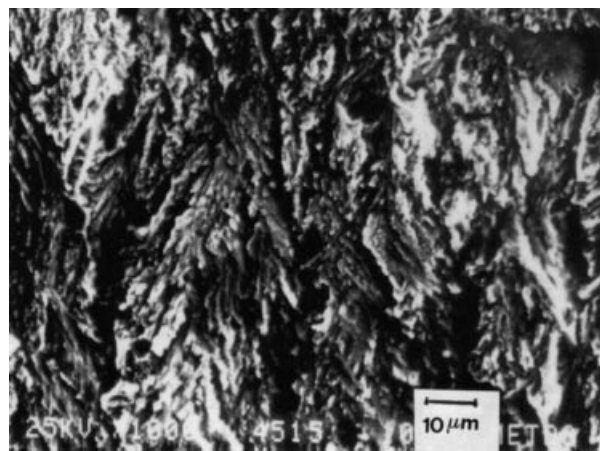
The fracture surface of AISI 304 near the threshold value.
